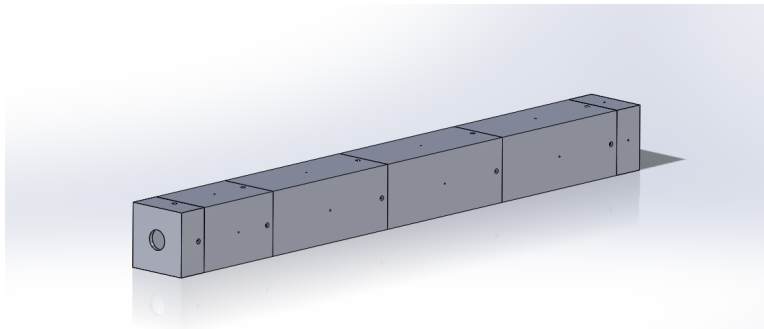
CAD model of 3D printed body inserted into experimental wave tank.
